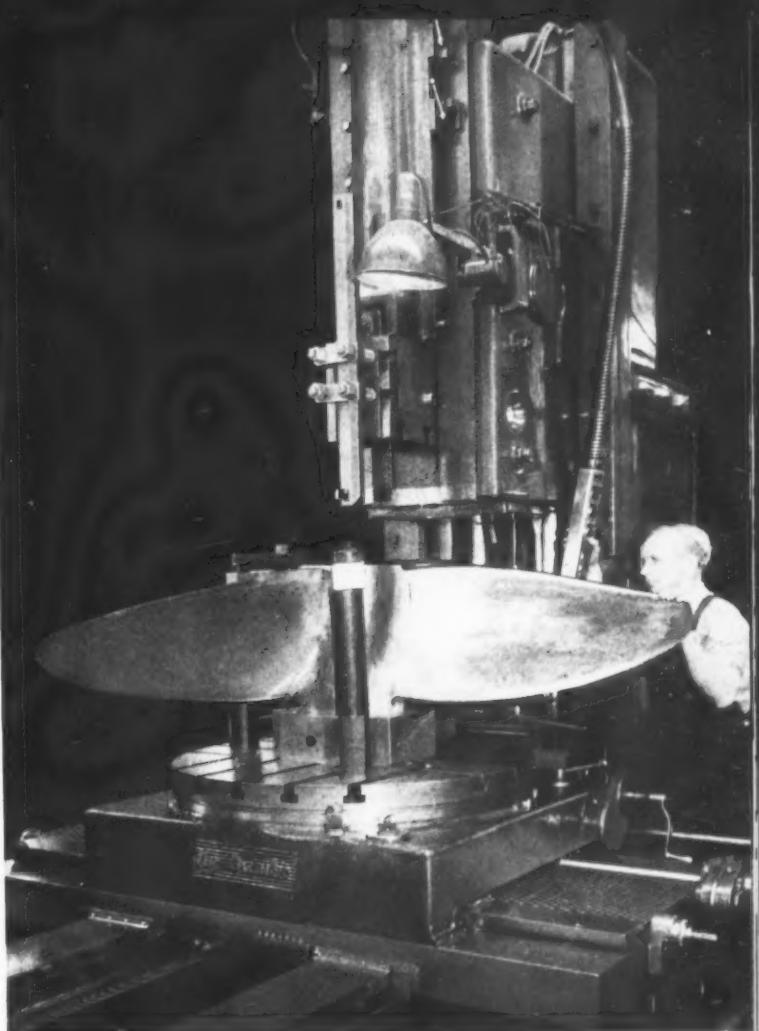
Cutting a Keyway in the Tapered Bore of a Patrol-boat Propeller by Employing a Hydraulic Slotting Machine
